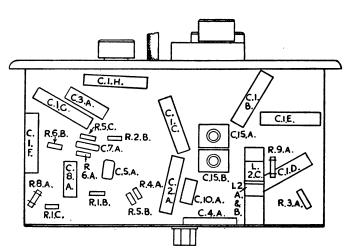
UNDERSIDE VIEW OF CHASSIS
